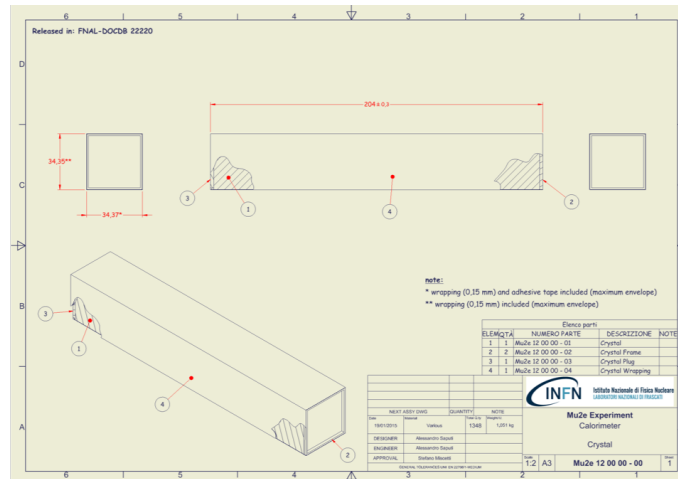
Technical draw of a Mu2e crystals. Dimensional tolerances are within 0.1 mm.
